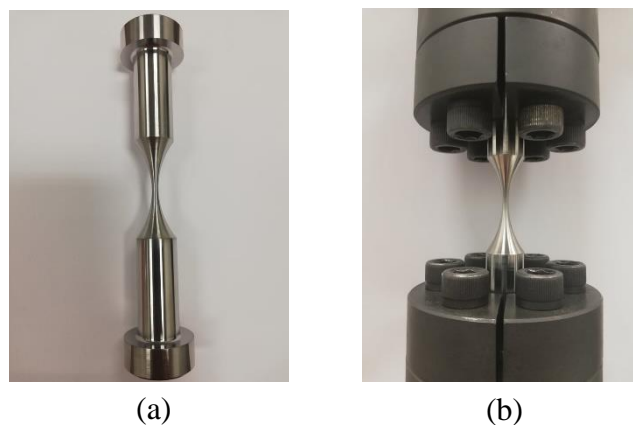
(a) Fatigue Test Specimen (b) Setup of Fatigue Test.
